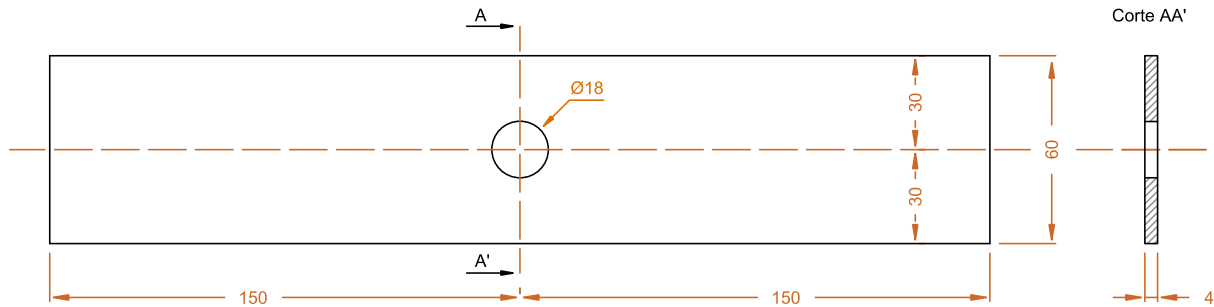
Geometry of S235 bolt hole used in experimental campaign (dimensions in mm).
